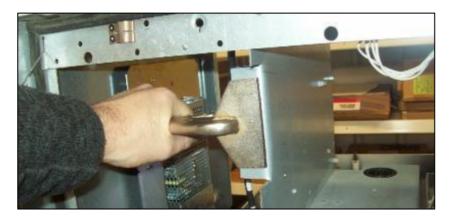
Initial bend using 3" Wide Jaw Vice Grips.
